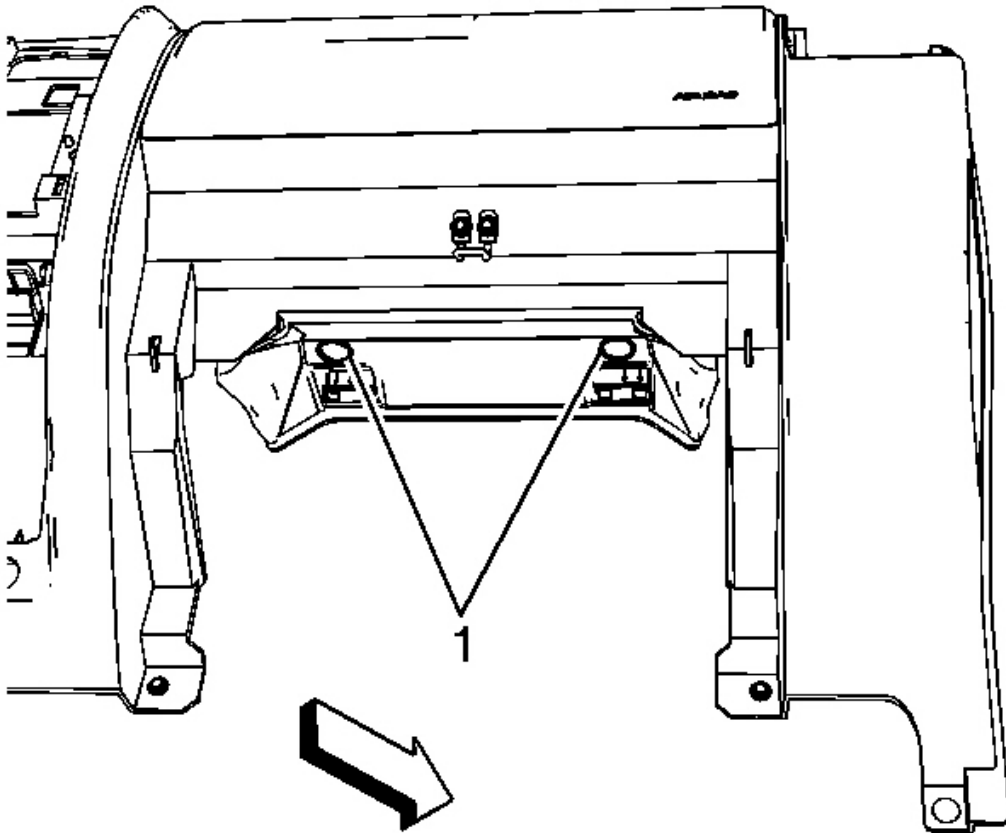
View Of I/P Compartment Door Opening Service Holes
